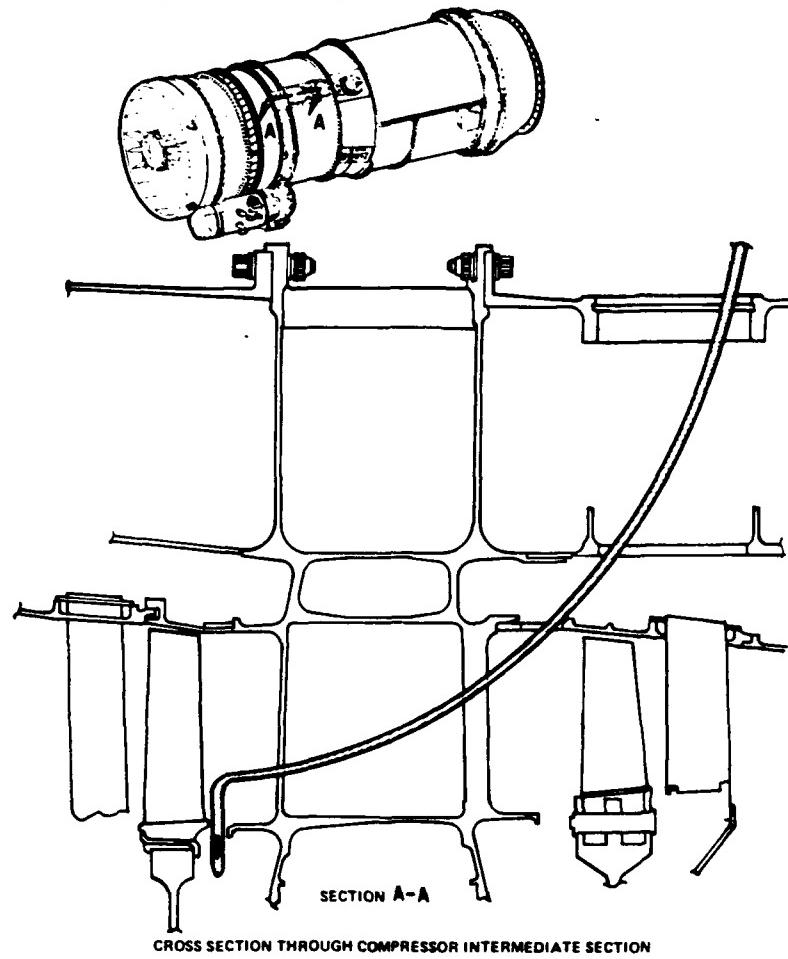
BORESCOPE INSPECTION THROUGH ENGINE BLEED PORT
